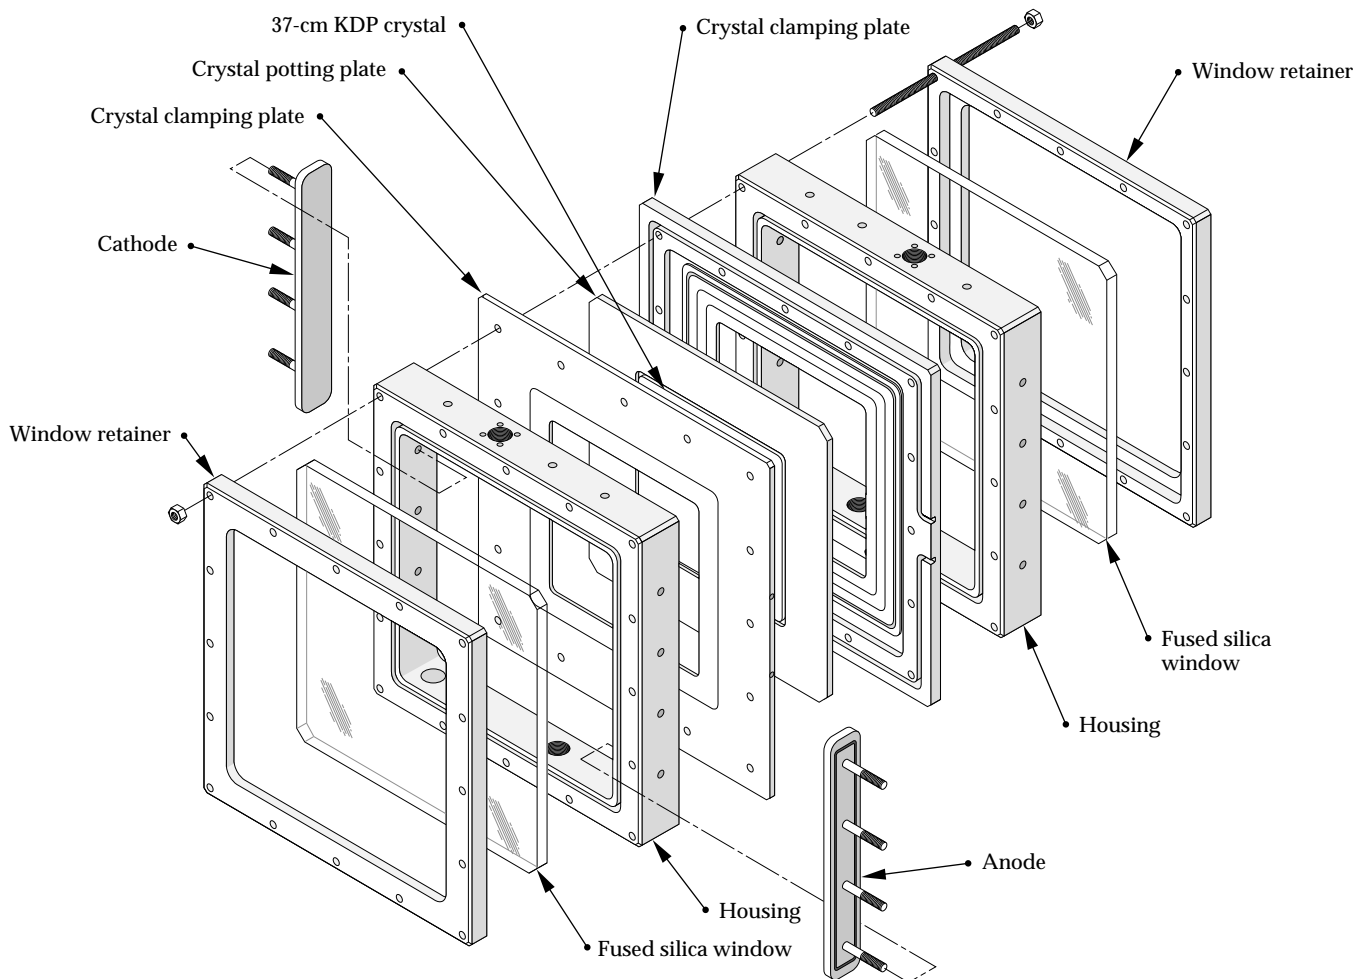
Exploded view of the PEPC assembly, showing the sandwich-like structure. (02-30-0391-1444pb01)
